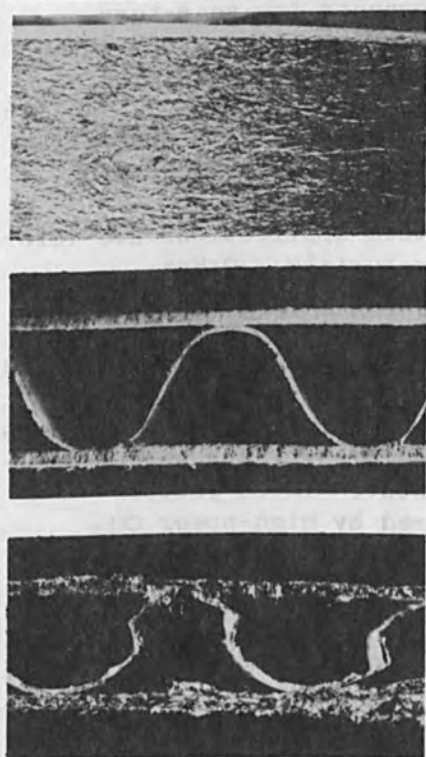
Laser cut characteristics in corrugated board 0.18 in. thick; laser power 3.9 kW, cutting speed 350 ft/min, no assist gas: (a) edge view of laser cut, (b) end view of laser cut, (c) end view of machine cut.
